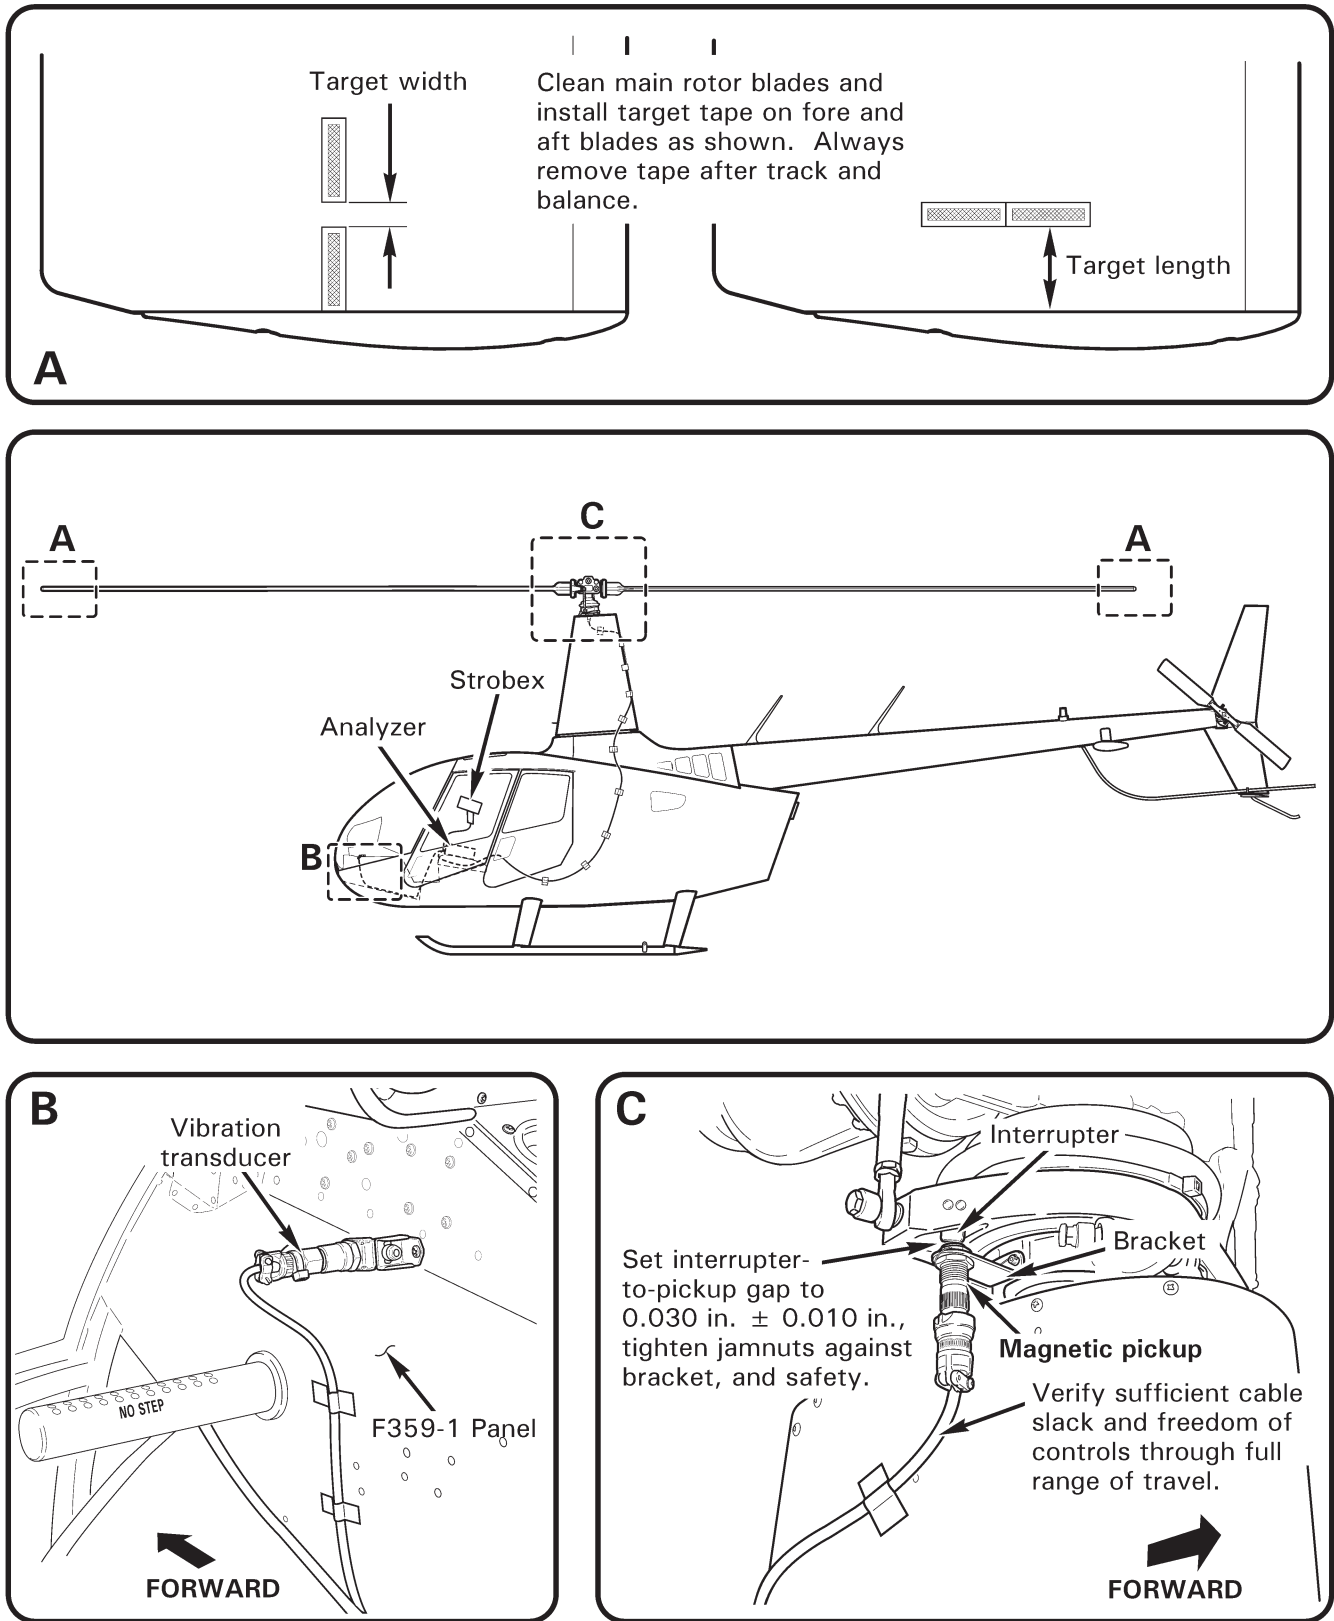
MAIN ROTOR BALANCING EQUIPMENT INSTALLATION
